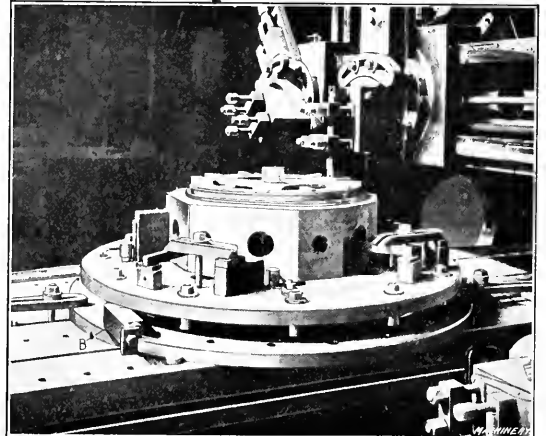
Planer Indexing Fixture with the Lock Mechanism B swung back
